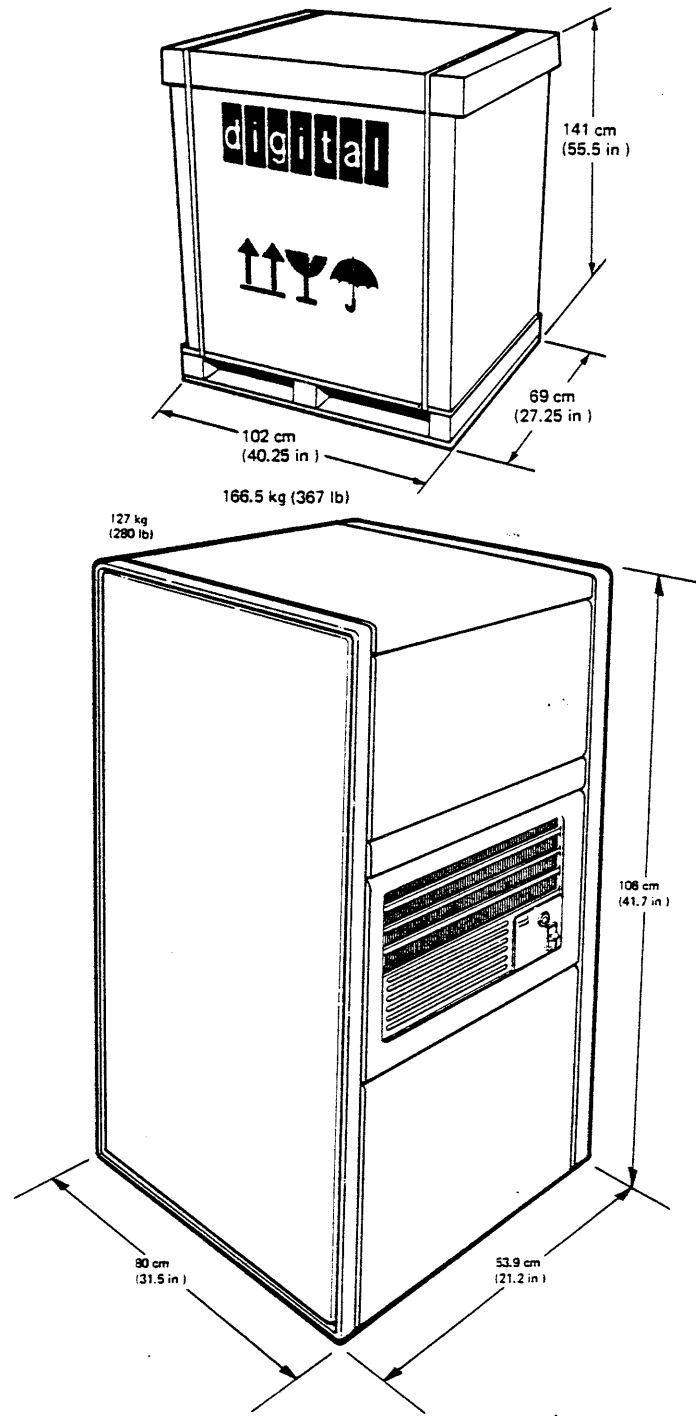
shows the dimensions of the unpacked PDP-11/94-E system and the dimensions of the shipping container.
